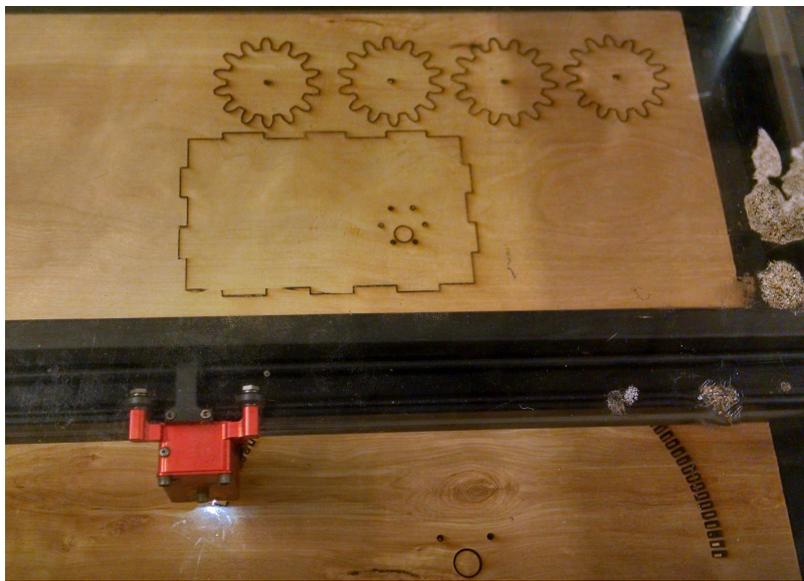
Laser Cutter Manufacturing Foamland Security Parts.
